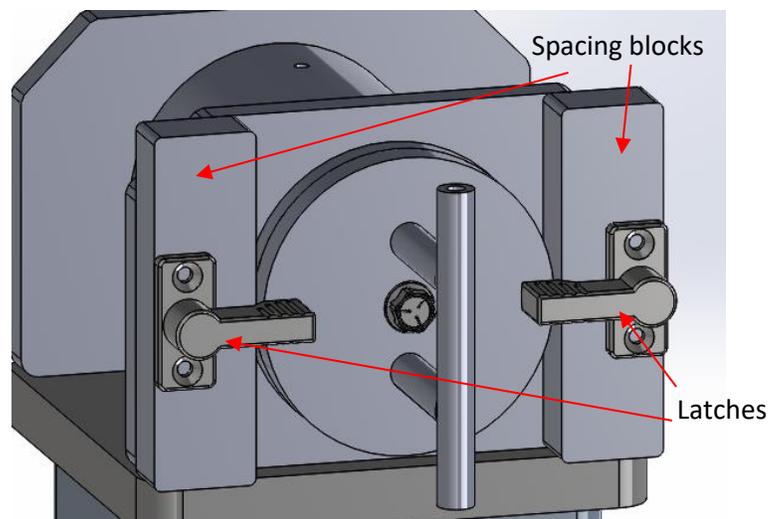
Safety latches and Spacing Blocks in Final Idle End Design, Shaft Housing
